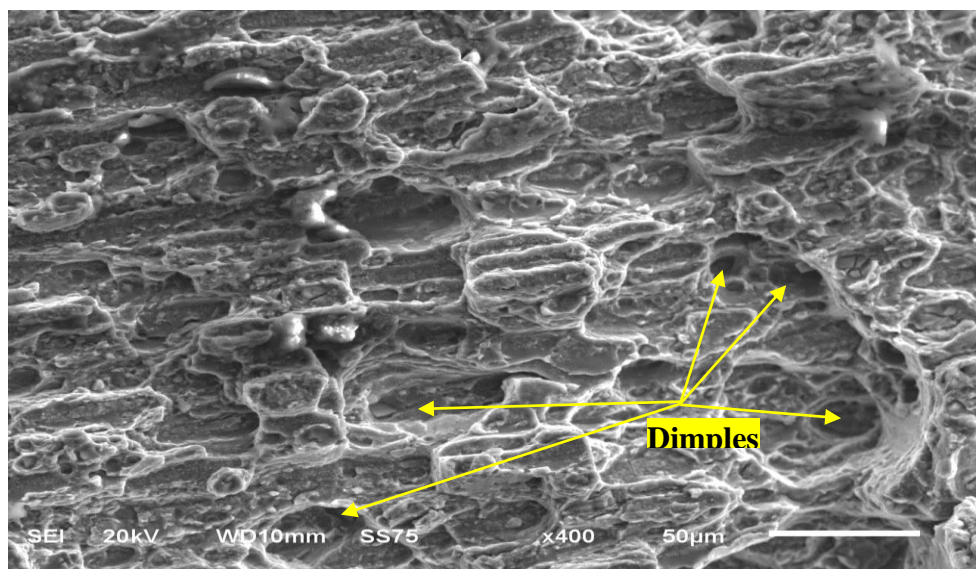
Fracture surface SEM image of the joint produced at 51 mm/min tool feed rate
